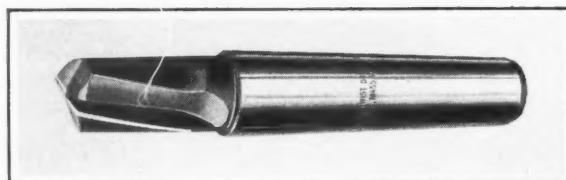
Two-lipped End-mill with Threaded Hole in Shank for a Draw-in Bolt
